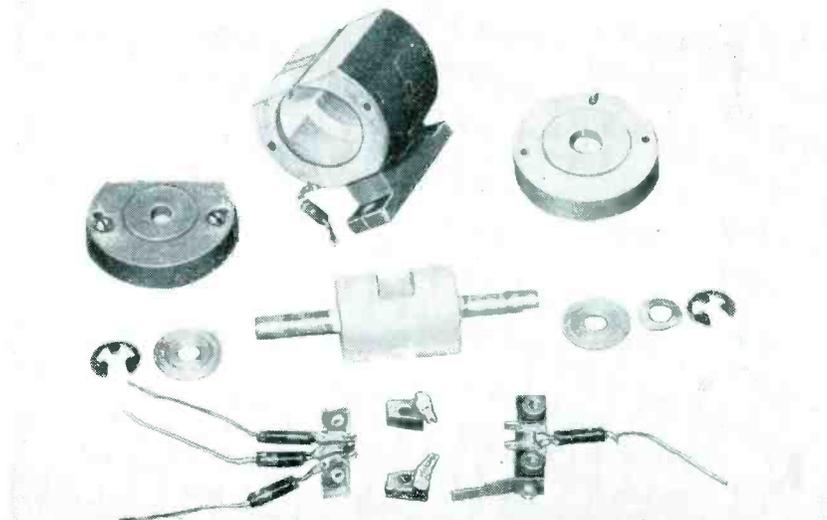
Disassembled view of oscillator. Stator consists of silvered area on inside of glass-bonded mica housing
